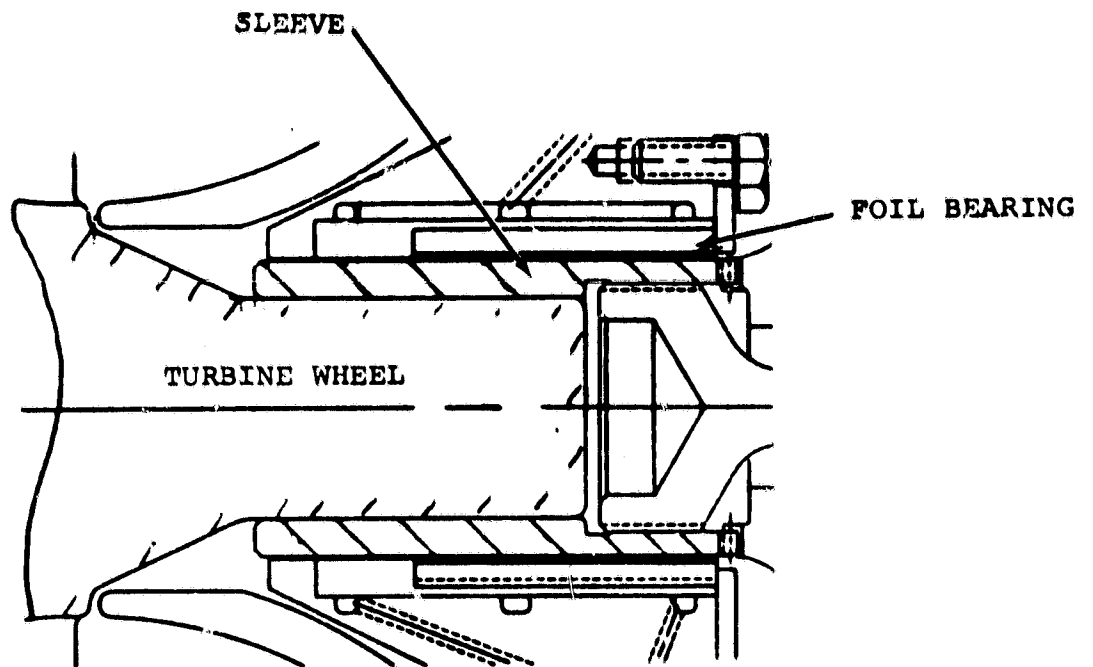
Ceramic Turbine Wheel Sleeve Attachment.
